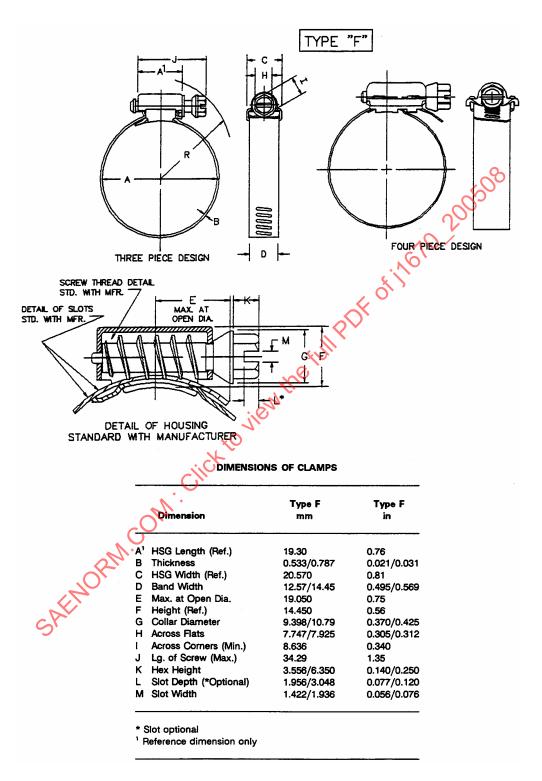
STAINLESS STEEL HOSE CLAMPS
